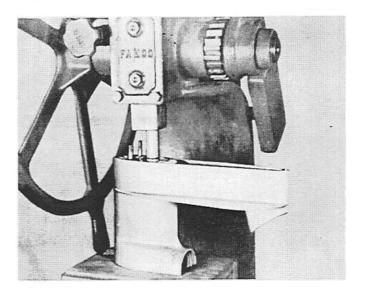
Removing (and Installing) Drive Shaft Roller Bearing
